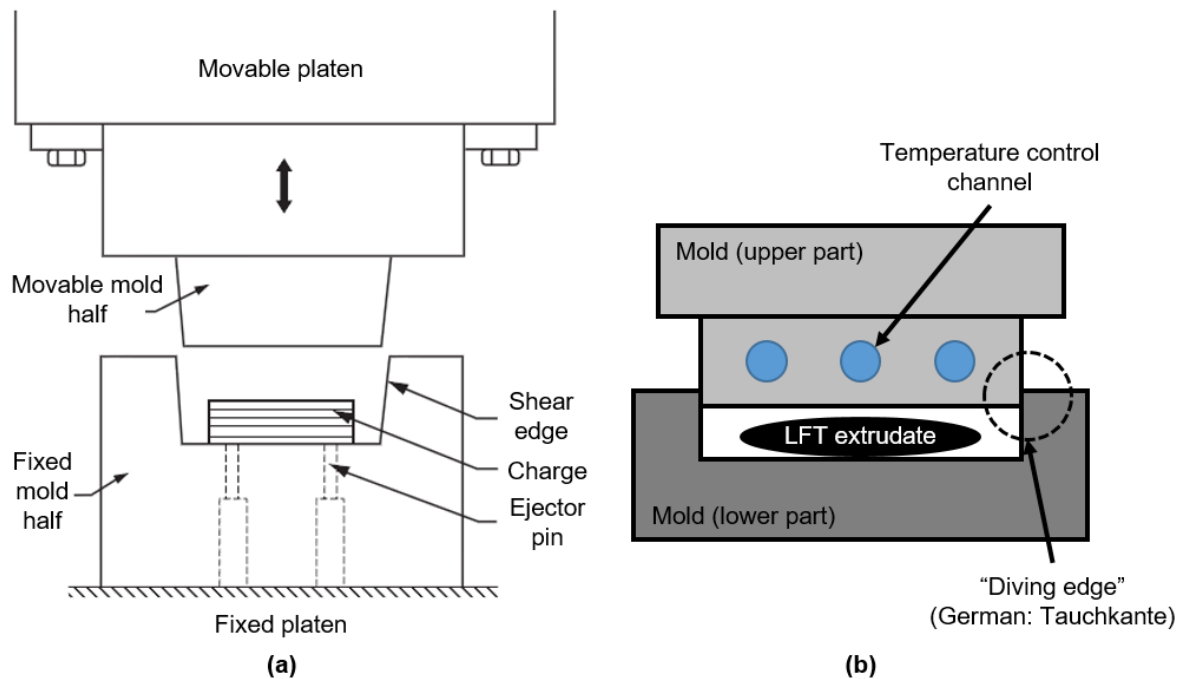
Schematic of a compression molding machine [13] (a) and its typical mold design (b)
